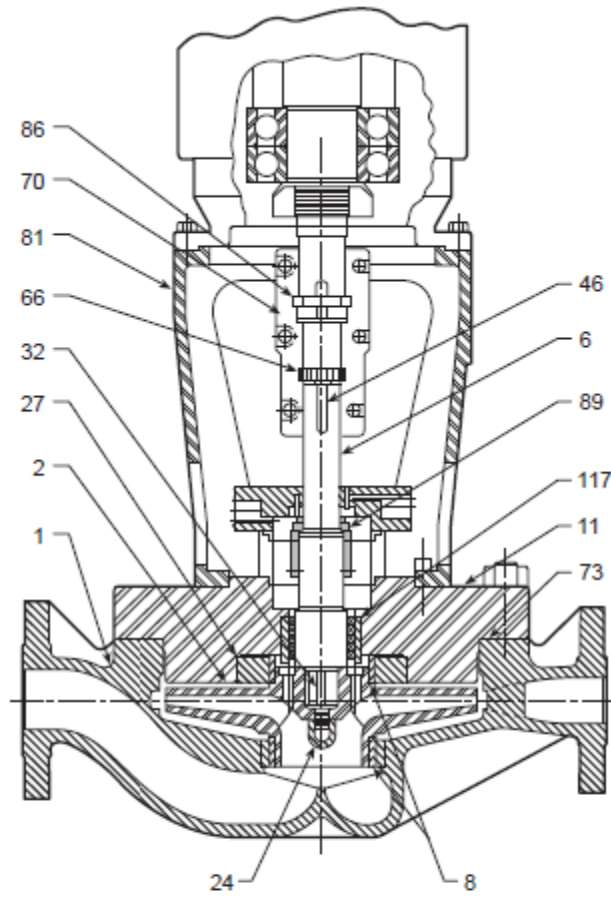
(c) Overhung Impeller — Close Coupled Single Stage — In-Line (Showing Seal and Packaging).
